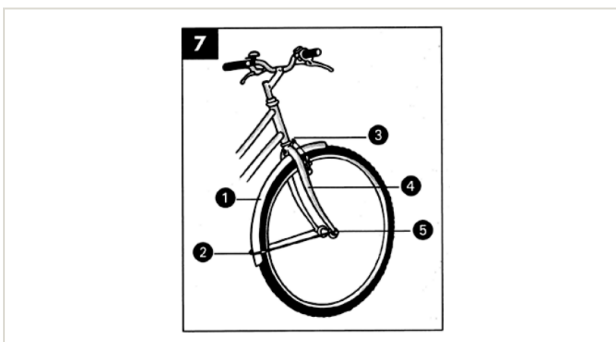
1 mudguard · 2 stay · 3 position of the safety washer or of the front brake bracket axle · 4 fork · 5 nut
